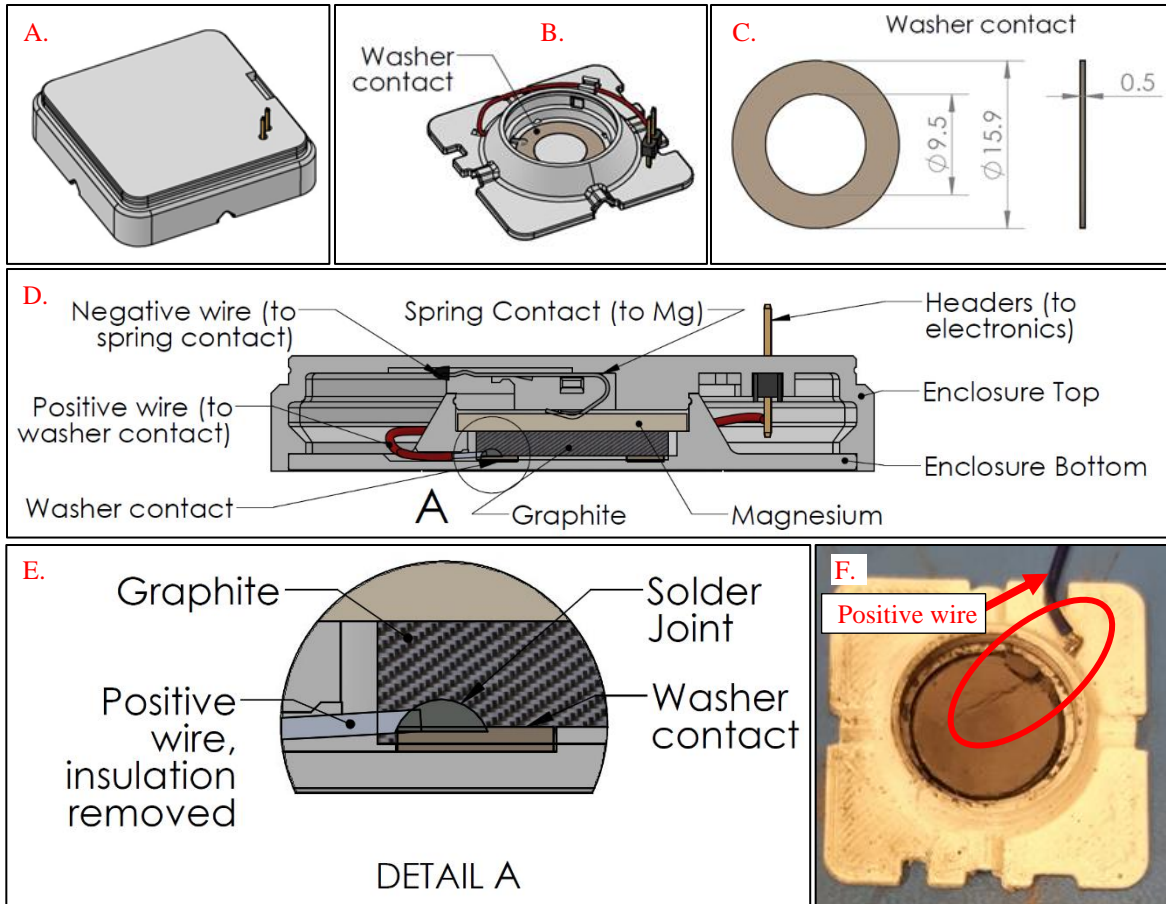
Copper nickel-plated washer contact in modified enclosure design. A) Complete enclosure, B) enclosure with some components hidden to show washer contact location, C) washer dimensions, washer manufactured by Switchcraft [66], D) cross section view with washer contact and sensor materials, E) detail view of solder joint location below graphite electrode, F) graphite electrode cracking above solder joint.
